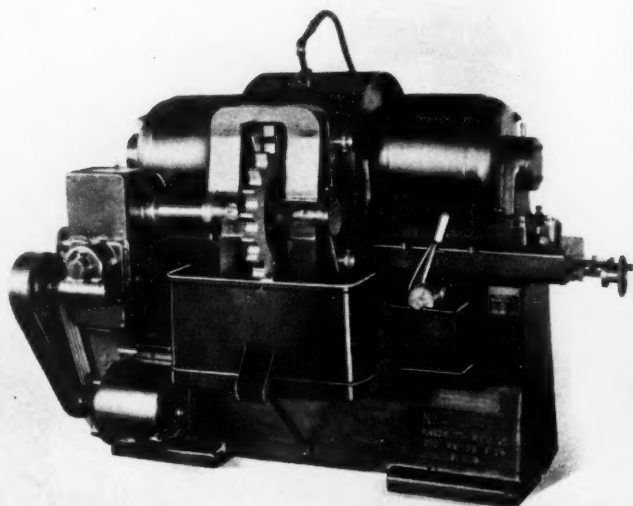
Machine Designed for Grinding Both Ends of Coil Springs at a Single Pass
